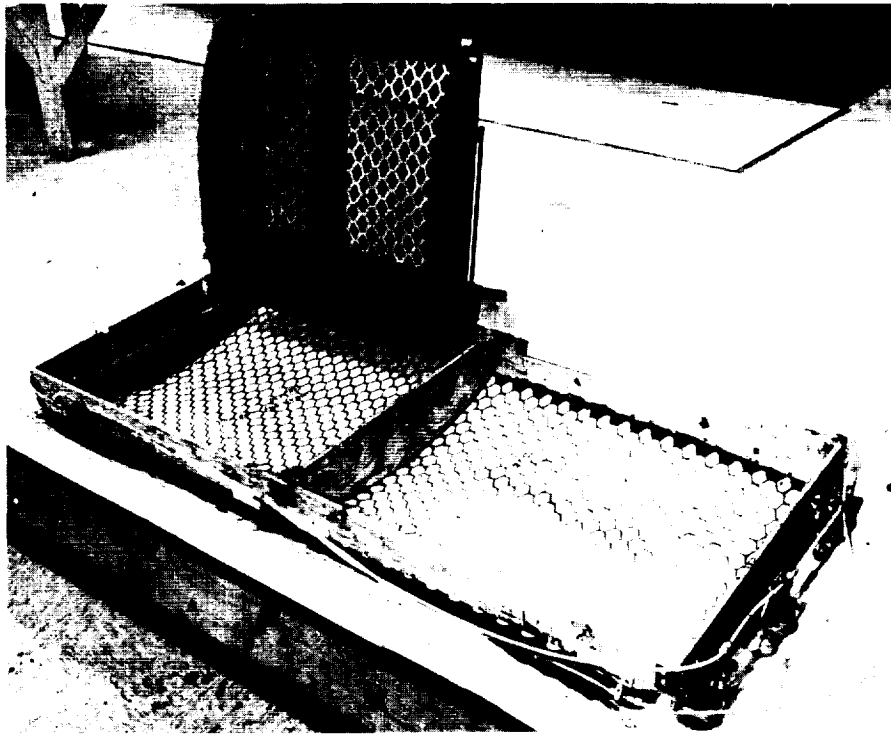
Installation Tool Shown With Stencil in Place on the Upper Panel Section Following Completion of Test
